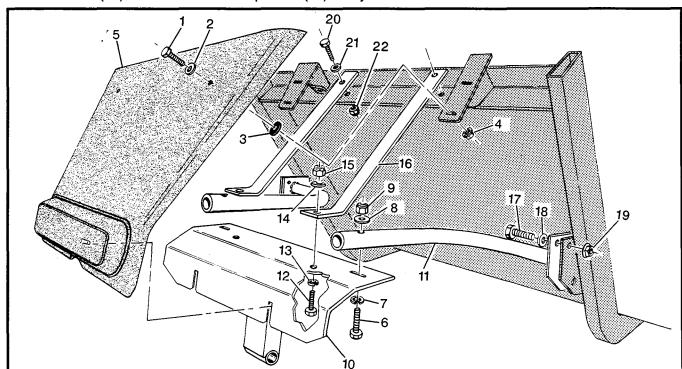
FOUR WHEEL FRONT SHIELD AND BUMPER
